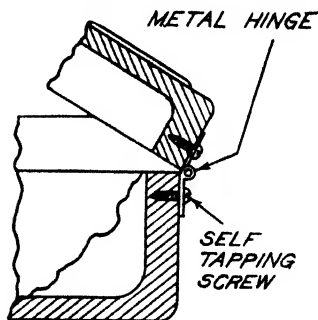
Metal hinges fastened to moldings with self-tapping screws.
